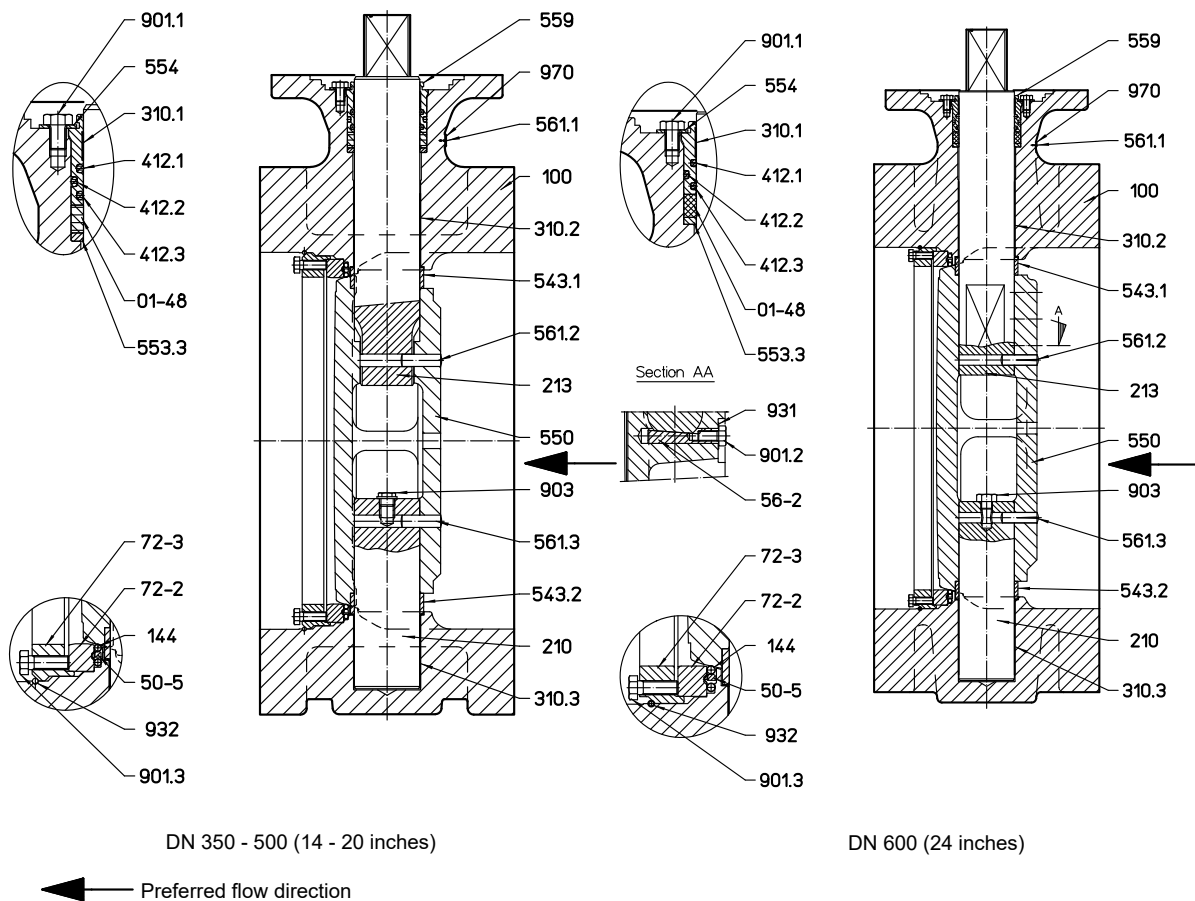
Sectional drawing of DANAIS MT II DN 350 - 600 (14 - 24 inches) / flanged body (T7) / metal design
